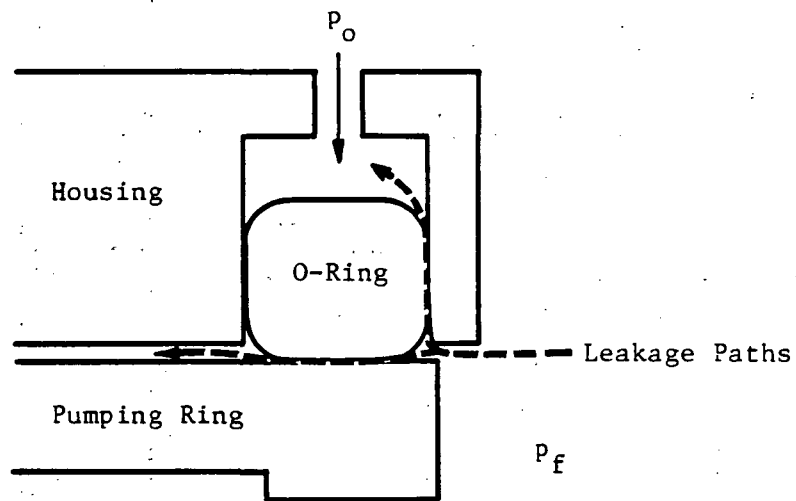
Schematic of Leakage Past O-Ring at High Sealed Pressures
